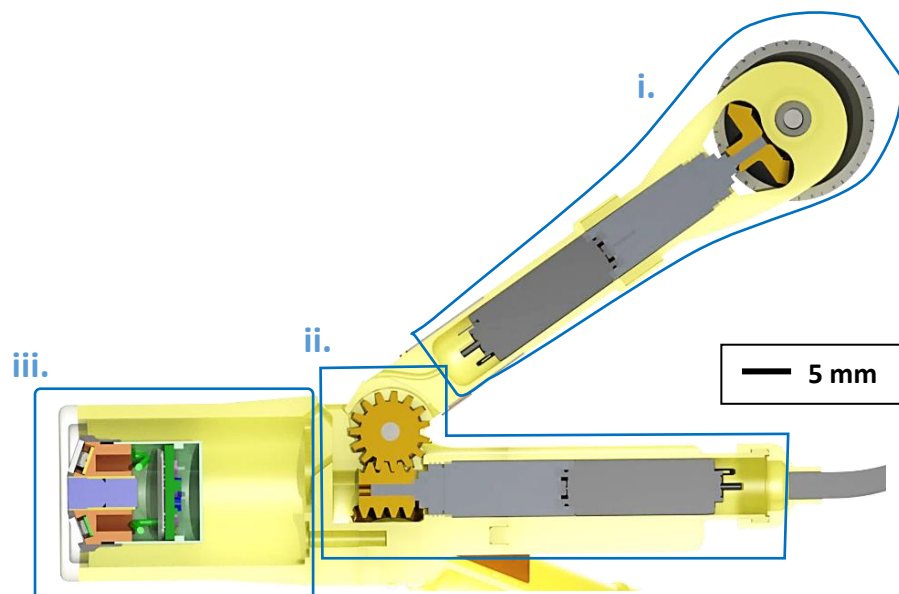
A cross-sectional view of RollerBall V4 showing the three main components.
